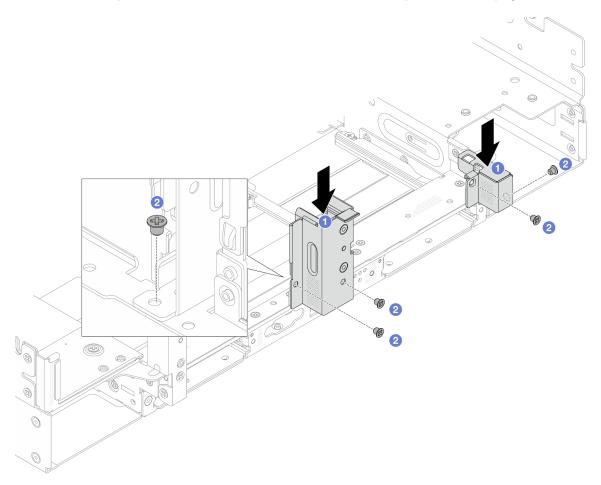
Installing rearwall brackets for the 4 x 2.5" rear drive cage
